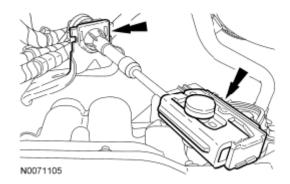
Locating Transaxle Shift Cable From Lever And Bracket Courtesy of FORD MOTOR CO.
